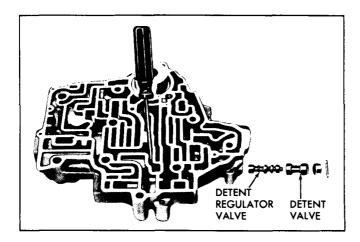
E-102 Installing Detent Regulator Valve and Detent Valve
